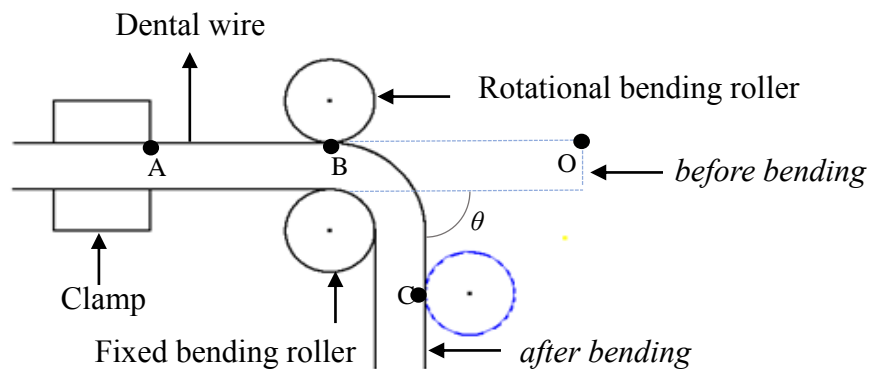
CNC dentistry wire bender and its main mechanisms
